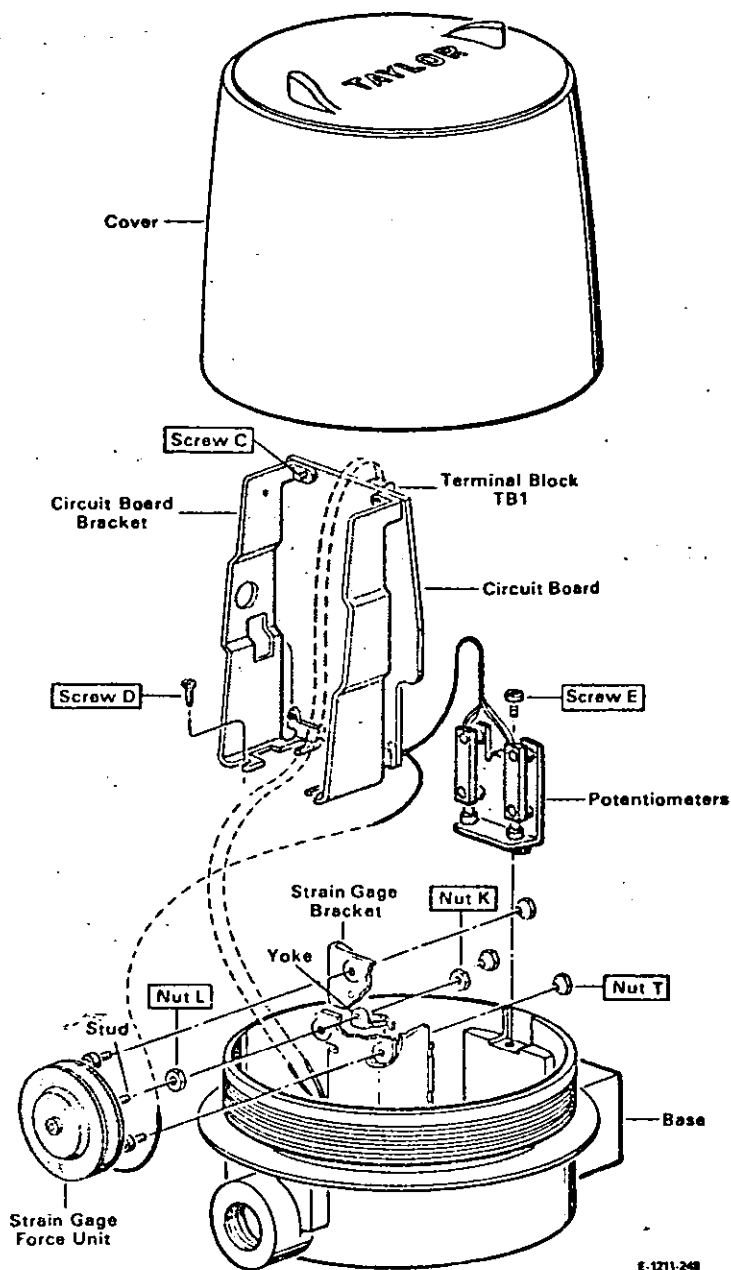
Replacing Electronics on Transmitter with Threaded Cover
